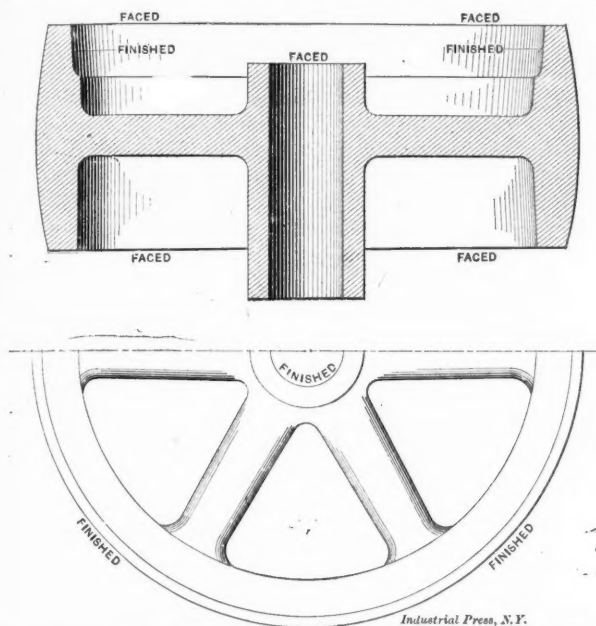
Countershaft Clutch Pulley, showing Surfaces to be Machined.
